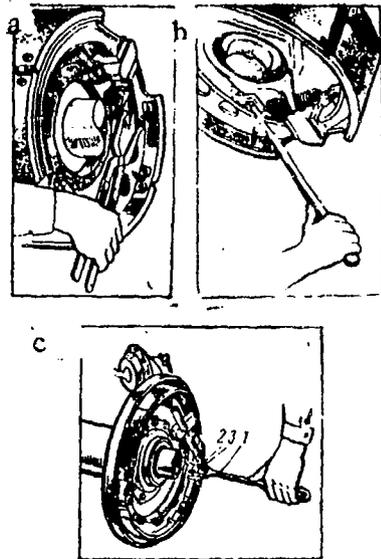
Removal and Installation of Brake Shoe Springs: a, removal of spring from front wheel brake of ZIL-130 using pliers; b, installation of spring in front wheel brake of ZIL-130; c, method of removal or installation of spring of wheel brake of ZIL-157K; 1, hook; 2, brake shoe finger; 3, end of spring
